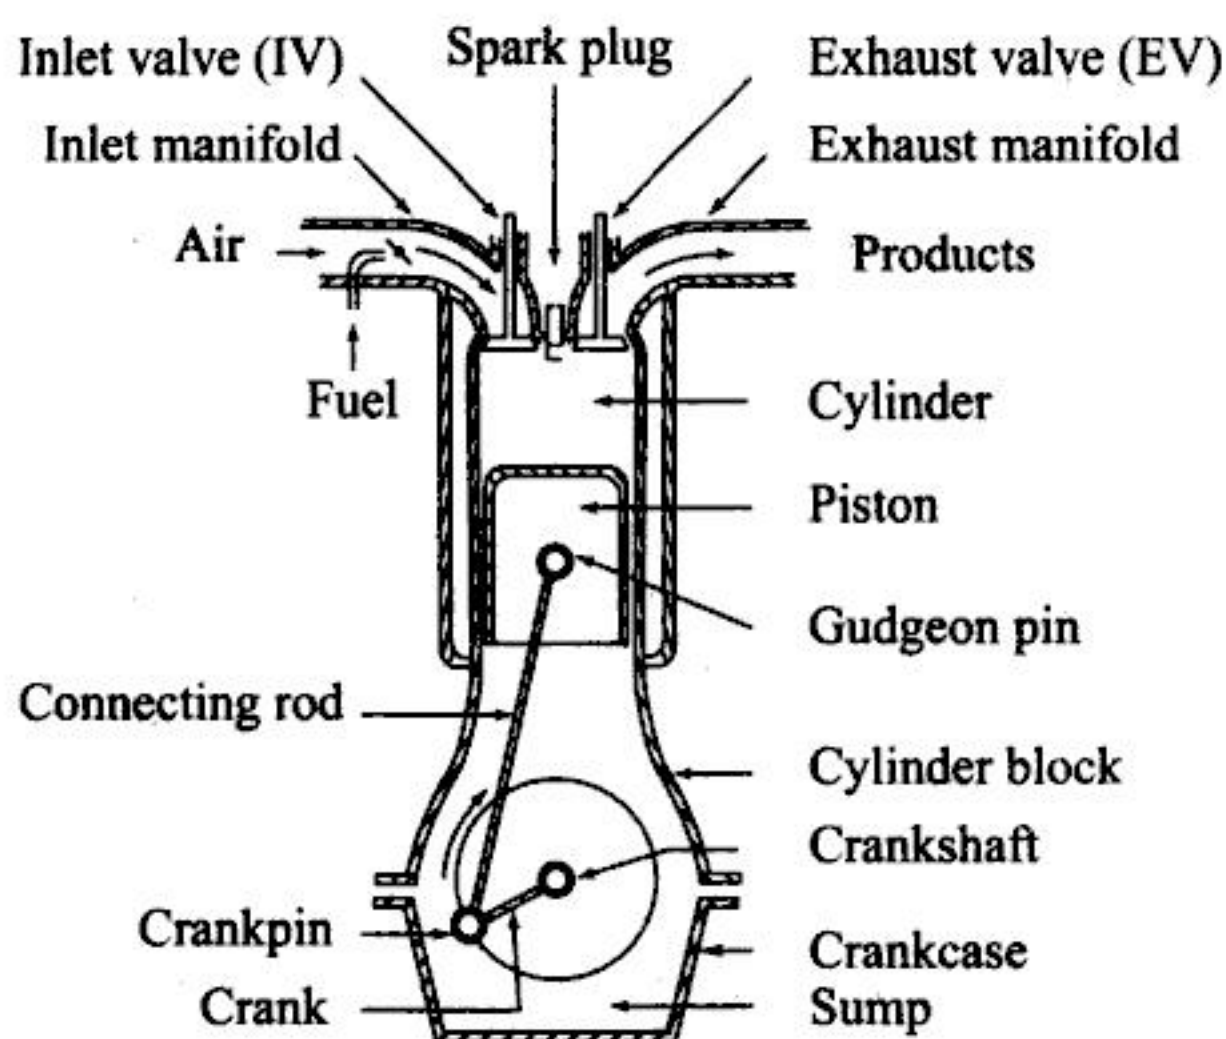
Cross-section of a Spark-Ignition Engine
